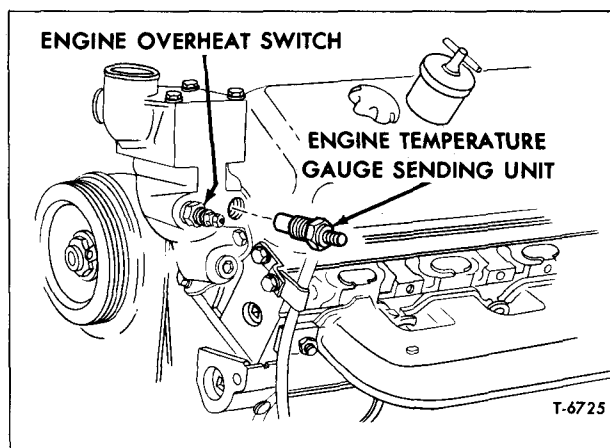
Temperature Gauge Sending Unit and Engine Overheat Switch (8V-71 Diesel Engine)
